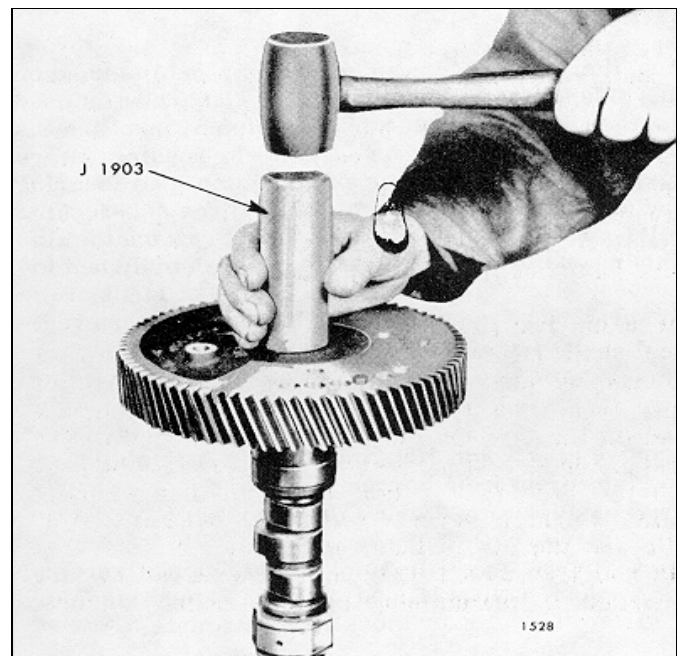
Replacing Gear (Camshaft Shown) with Tool J 1903
